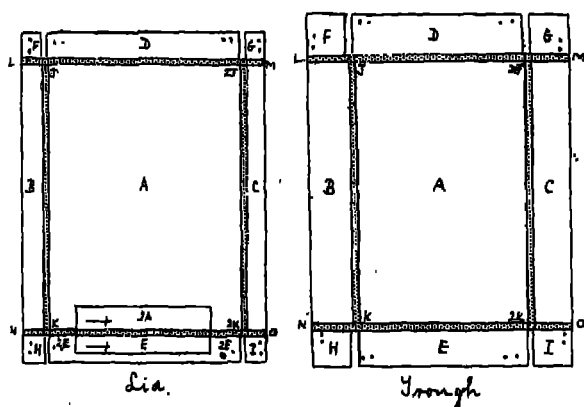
TWO-PIECE EXAMPLE, TAKING SIX CYLINDRICAL WRITING SETS.
